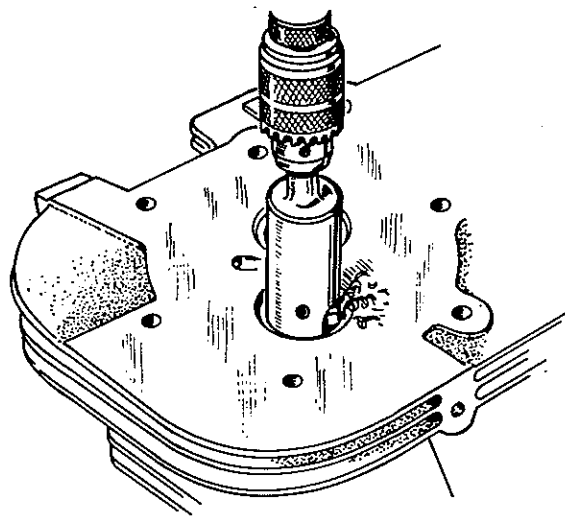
REMOVING VALVE SEATS — J-SERIES
